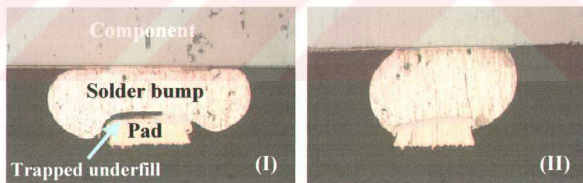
Solder Joint Cross-sections: (I) underfill trapping between solder bump and pad; (II) good bonding between solder bump and pad (Lu et al., 2001).
